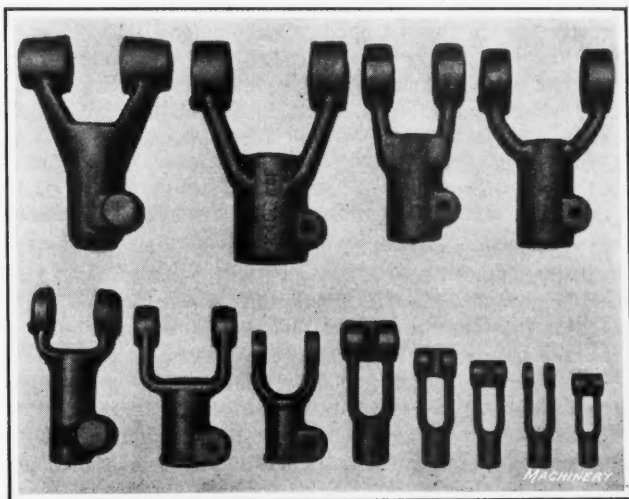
Collection of Yokes, Forks, etc., of Various Sizes and Styles, machined on the Tilted Rotary Milling Machine
